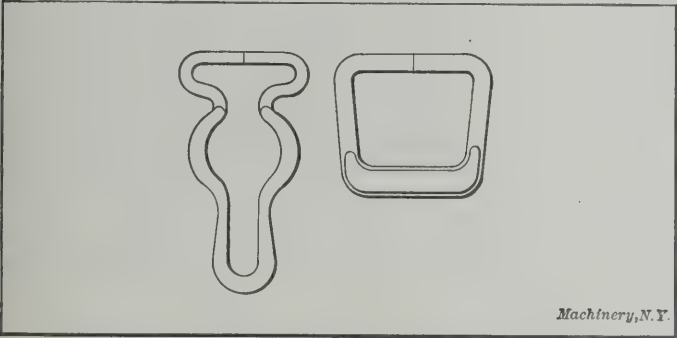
Examples of Work Done on Machine shown in Fig. 1
